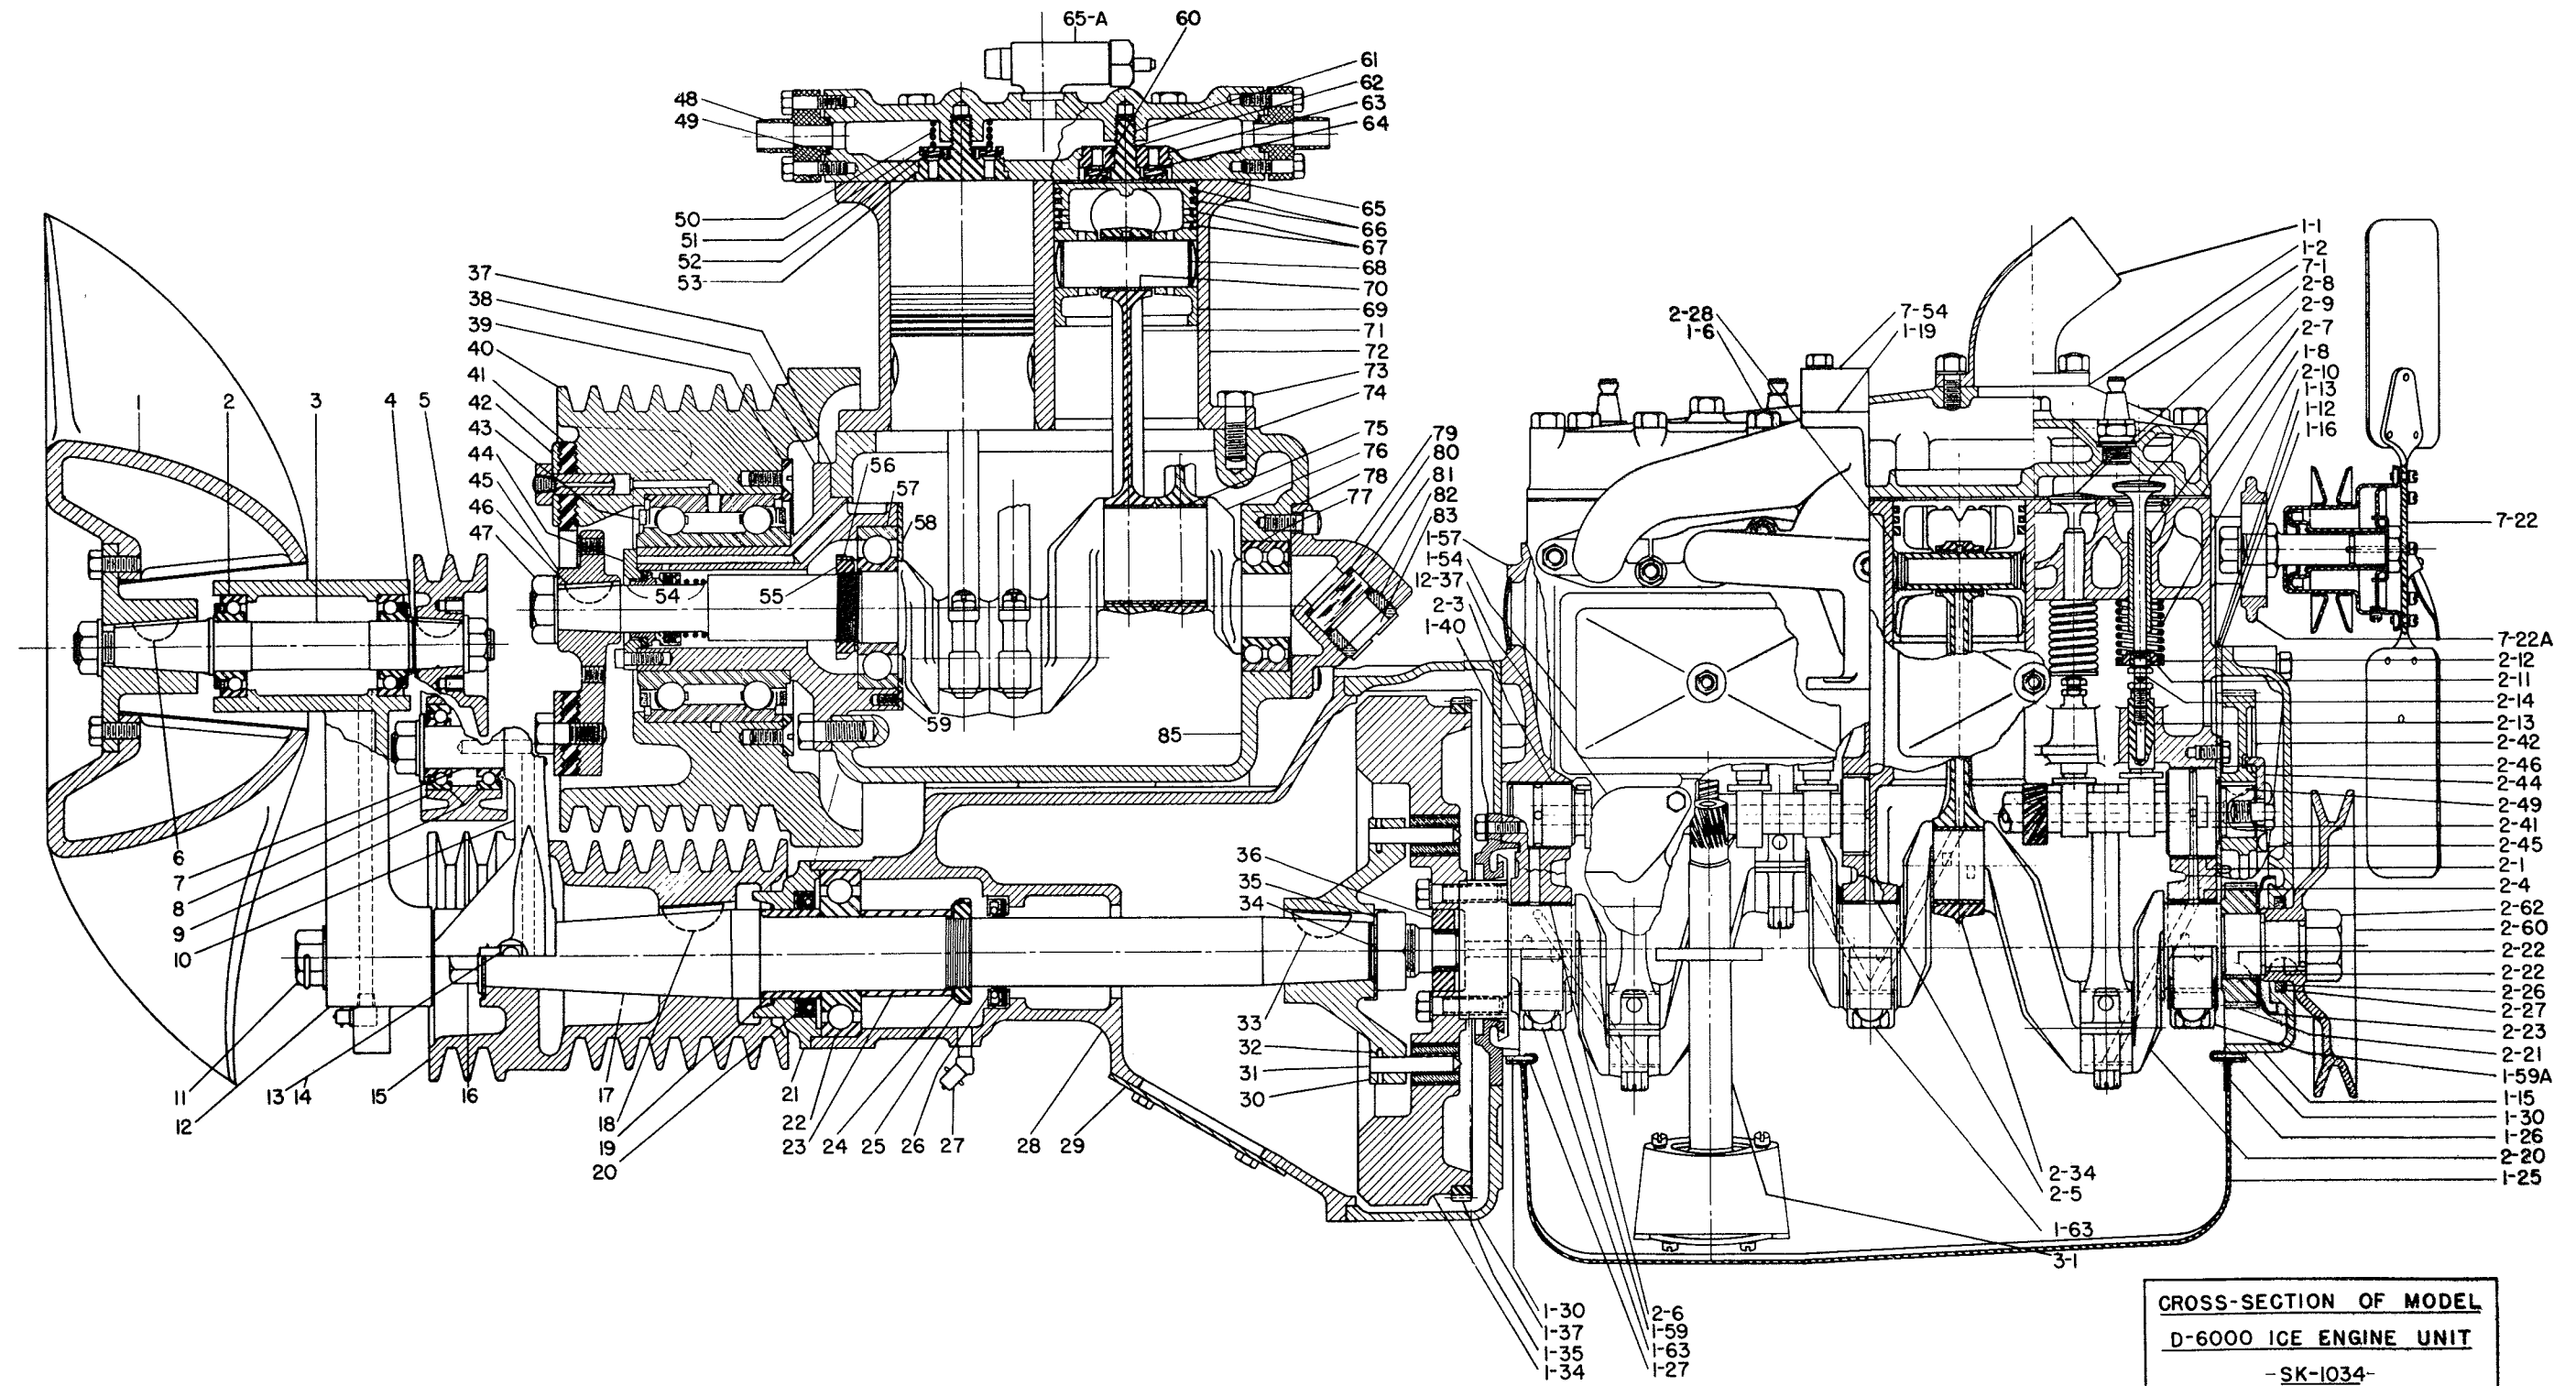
CROSS-SECTION OF MODEL "D" ICE ENGINE UNIT
